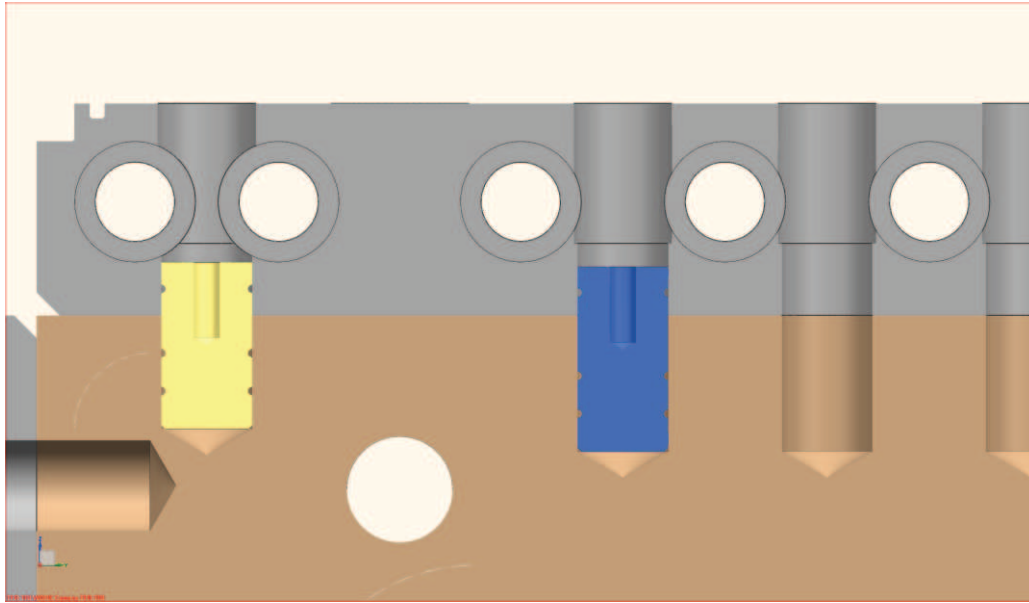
Detail of a section view of the repair of the AISI side plates mechanical connection
